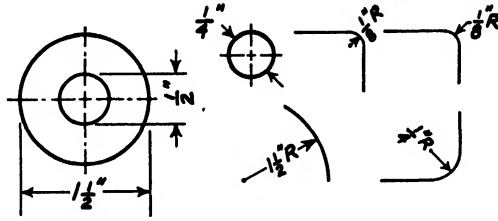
Examples of dimensioning holes, circles, and arcs.
